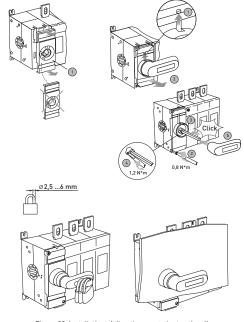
Installation of directly mounted rotary handle for 315-2500 A models
